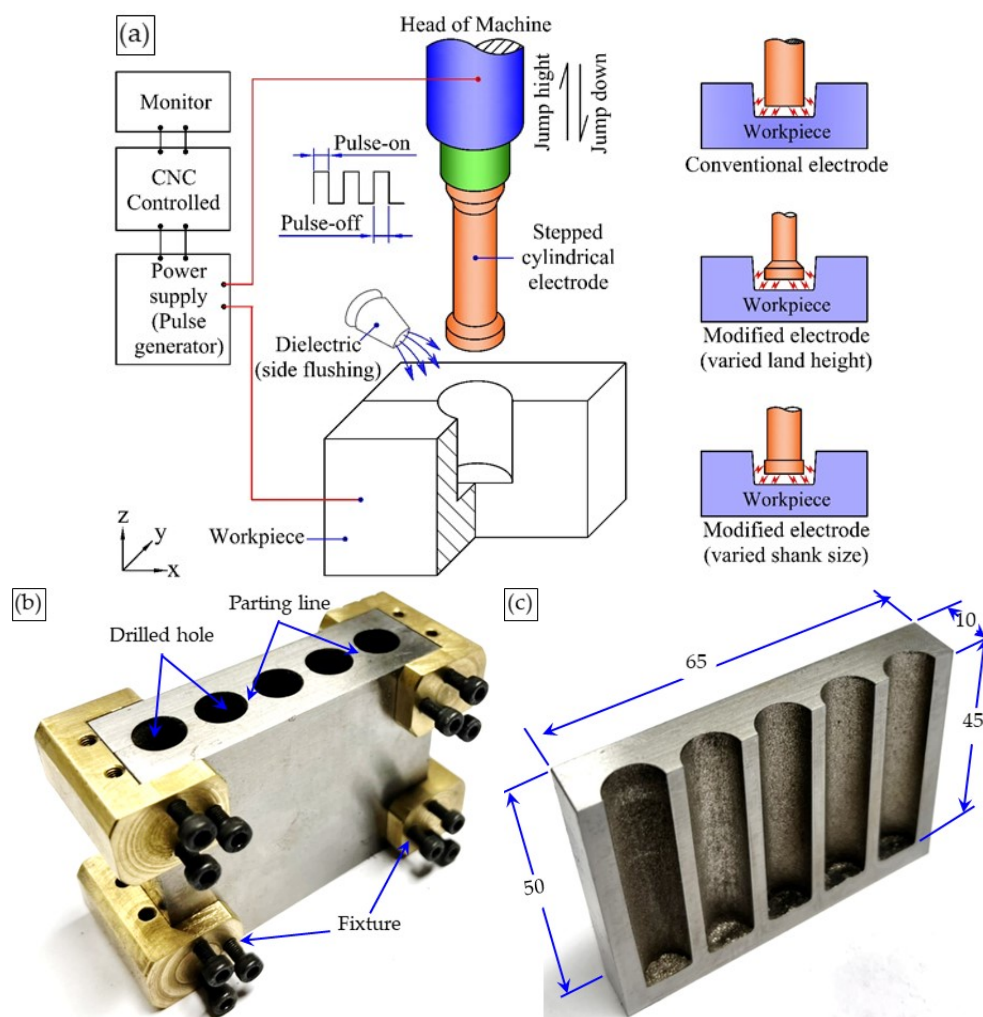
Experimental setup: (a) schematic of the experimental setup; (b) assembled coupled plate with screw clamps; (c) drilled holes in the steel plate
